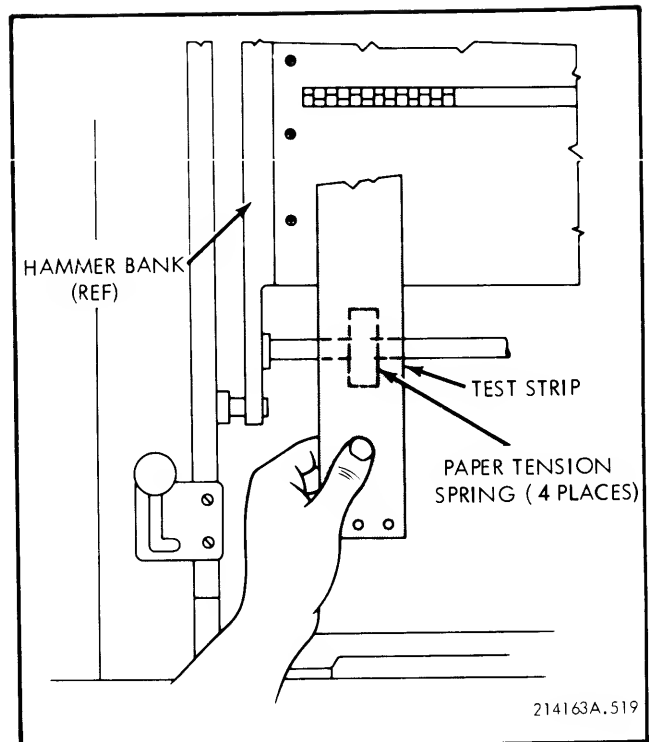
Test Strip Placement For Paper Tension Spring Adjustment
